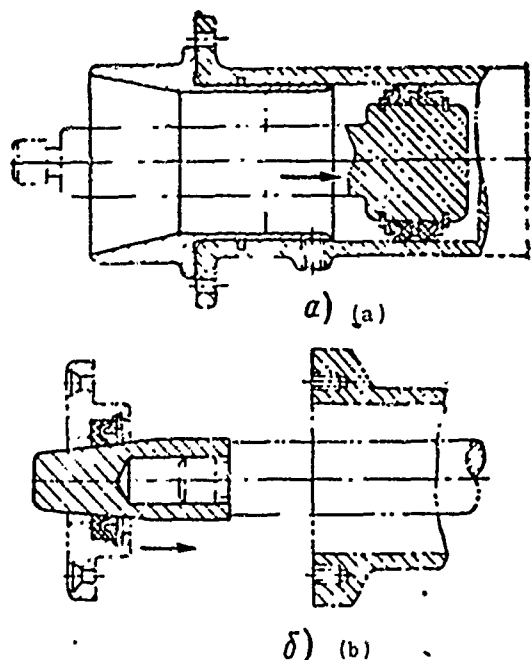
Devices for installing seal rings: a - into the housing; b - on the rod (the parts of the assembly are shown by the dot-and-dash line).
